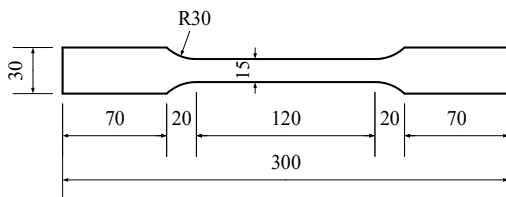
Geometric dimensions of monotonic tensile coupons.
